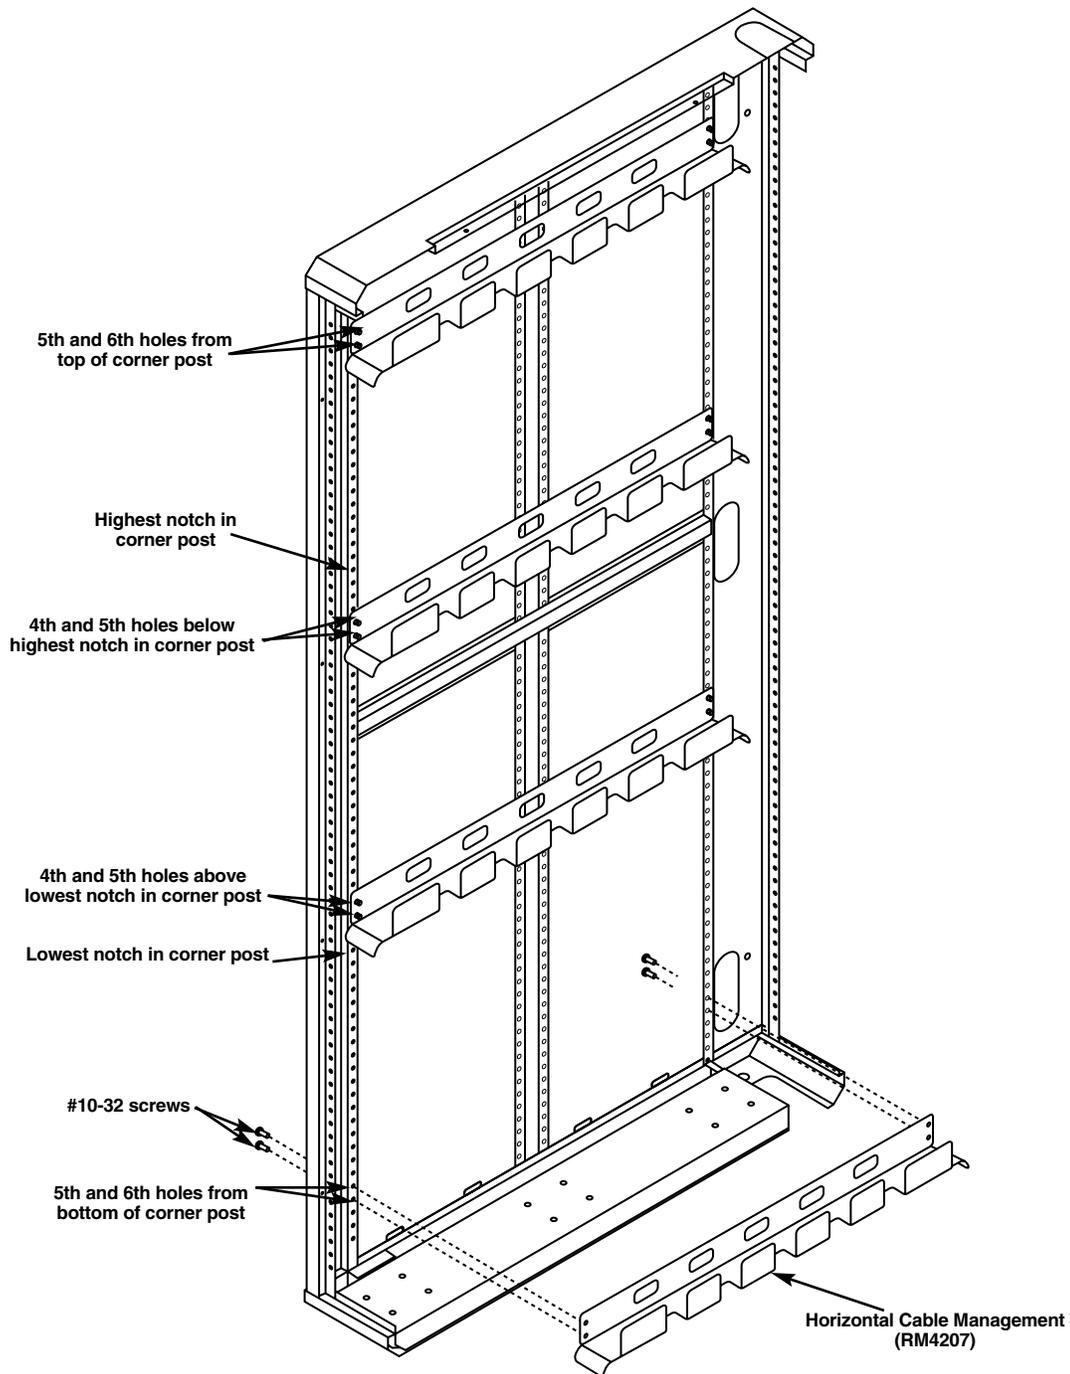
Horizontal Cable Management (RM4207) mounting.
